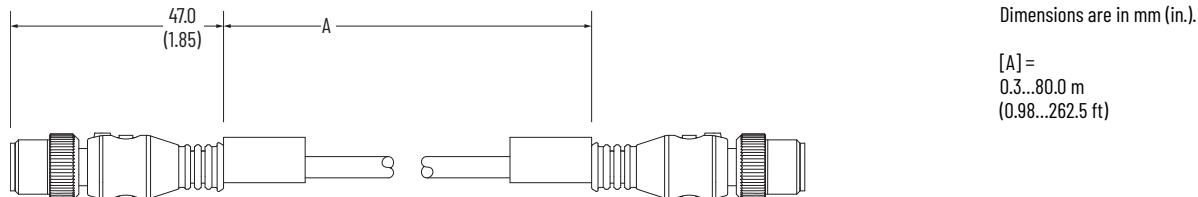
Communication Cable Assembly (1585D-M4TBJM-x)
